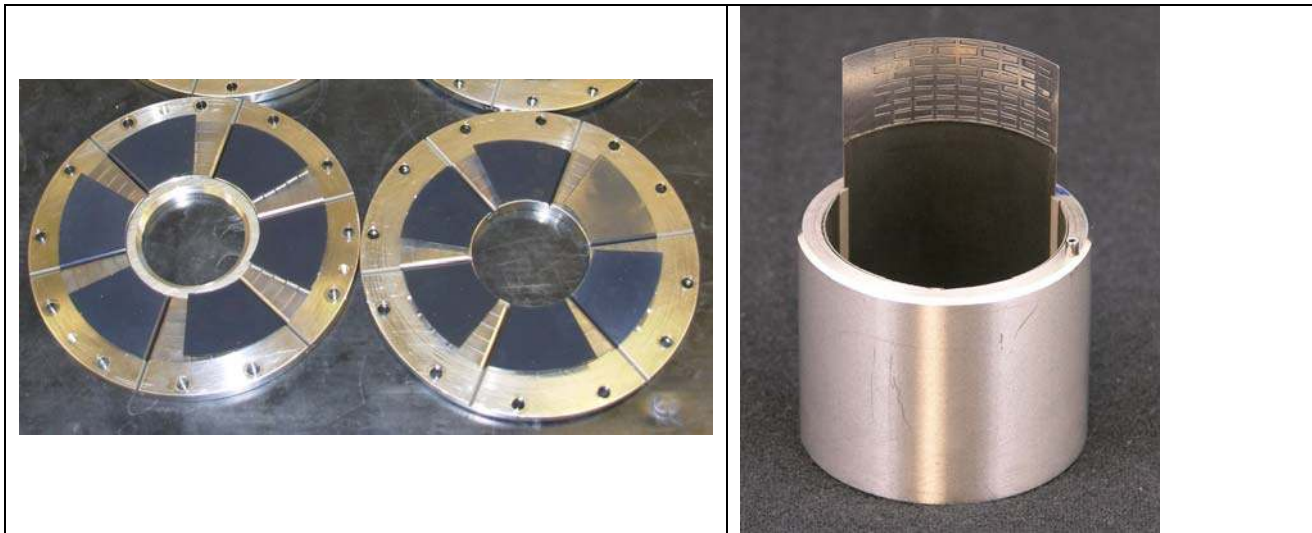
Photos of the gas foil bearings for use in the GenIV turbomachinery. The left image shows the bump-foil thrust bearings which were designed and manufactured by Barber Nichols Inc. The right image shows the journal gas foil bearings. These bearings were purchased from Capstone Microturbines.
